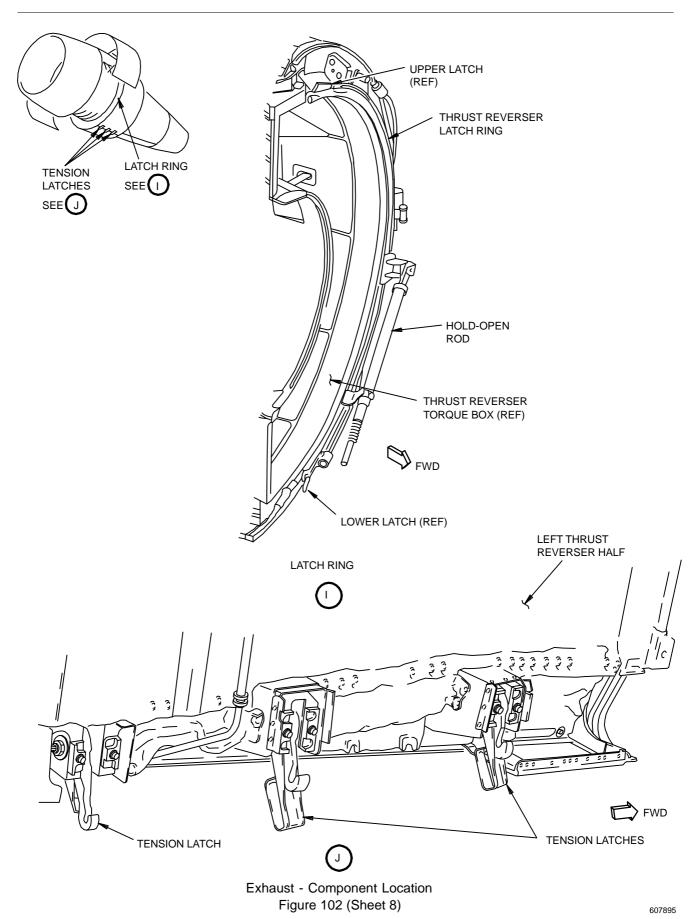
78-00 Exhaust Component Location Fig. 102 (Sheet 8)
